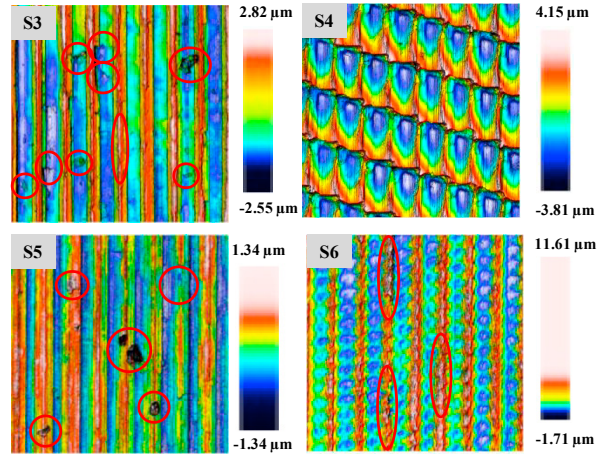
Defects on the machined surfaces (see test ID in Table 1).
